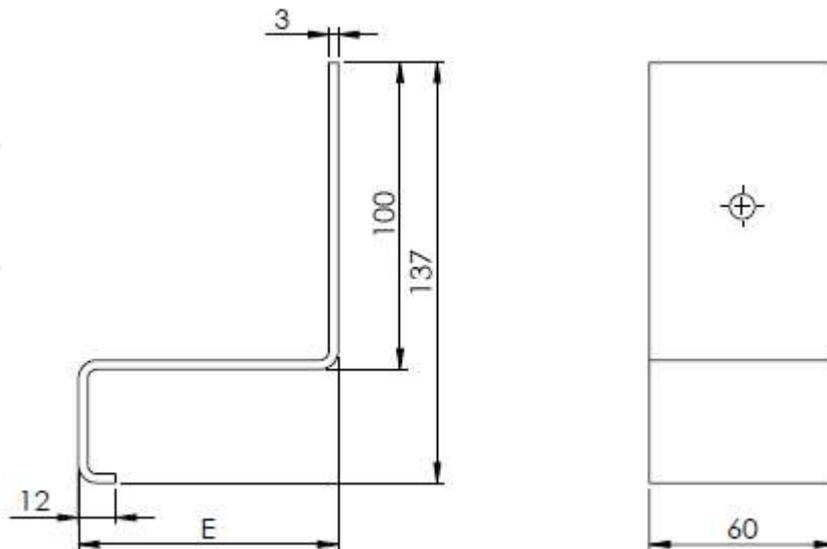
Proposed dimensions of mounting brackets for installation in a ceiling
